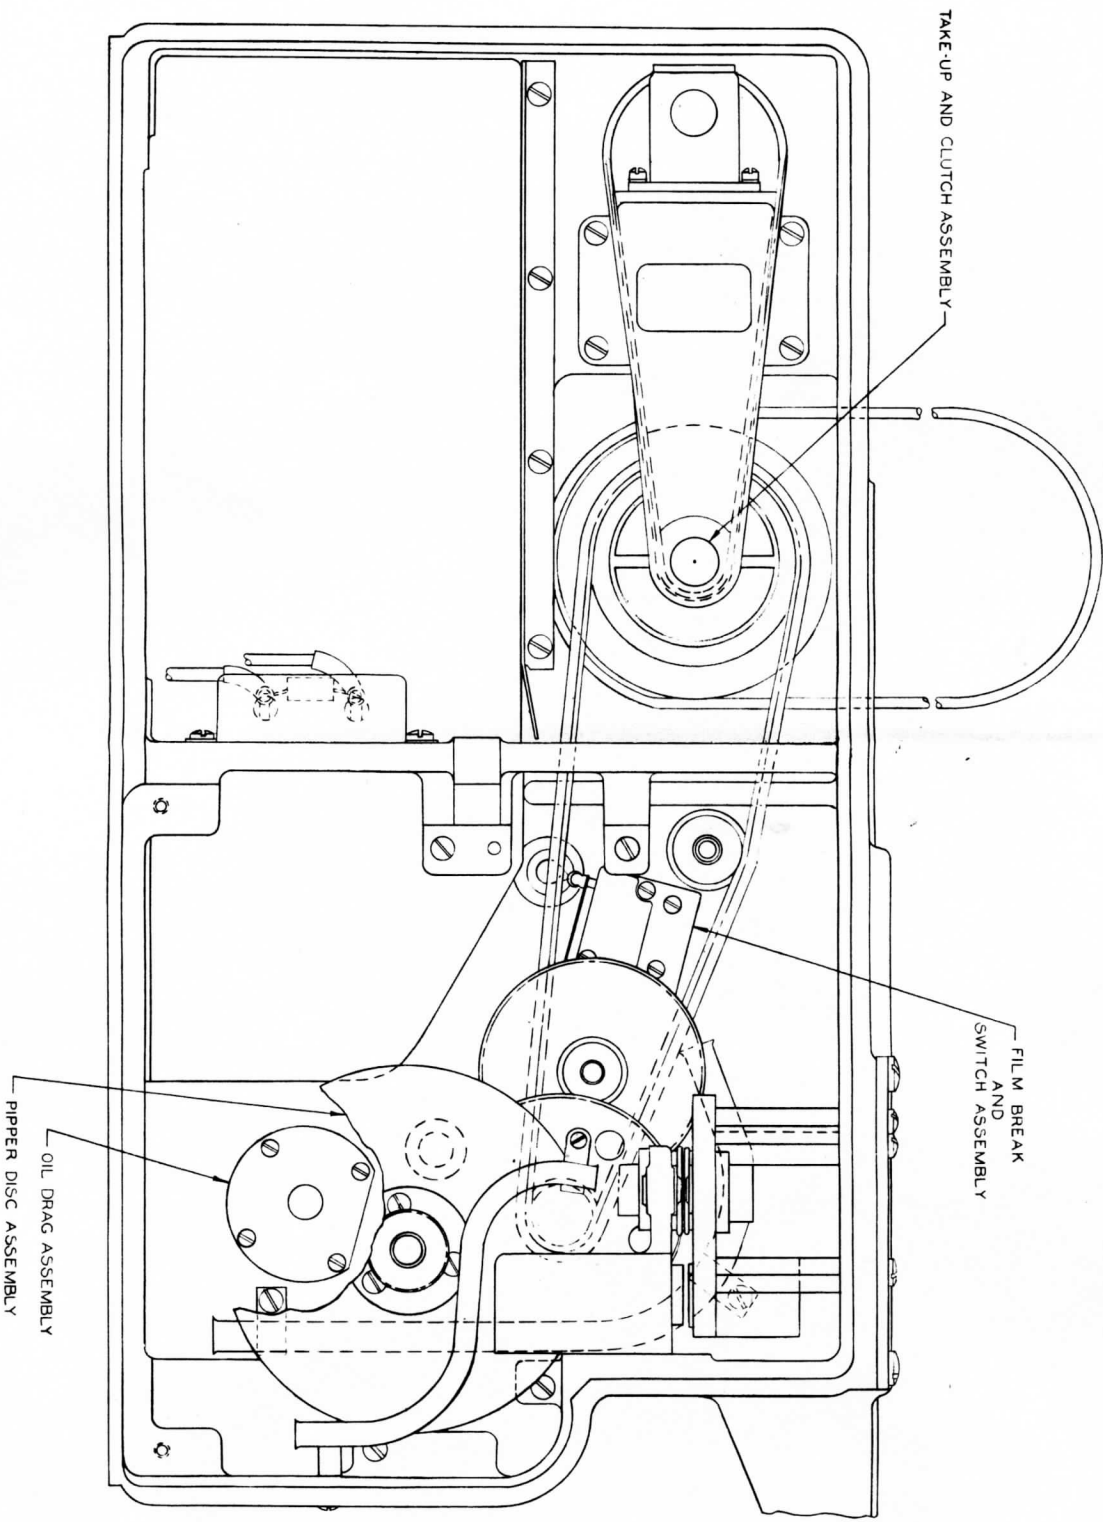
CPL Video Recording Camera, rear view, line drawing
